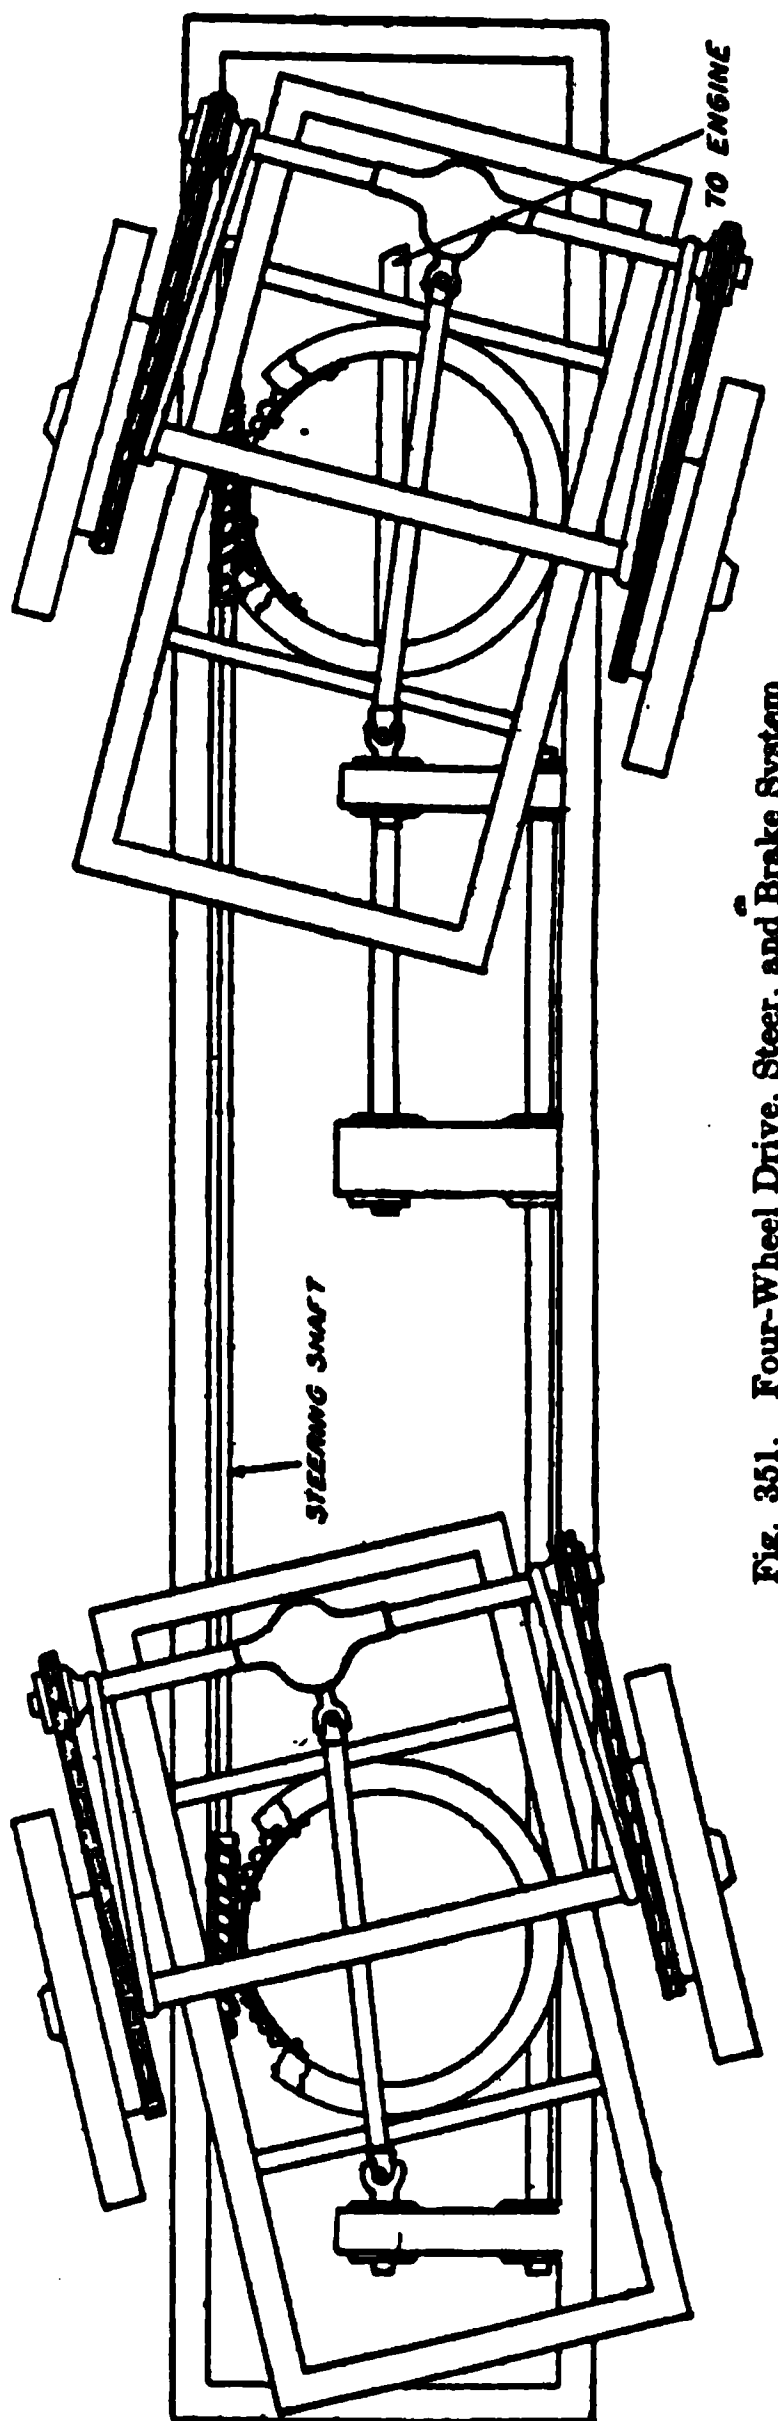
Four-Wheel Drive, Steer, and Brake System
